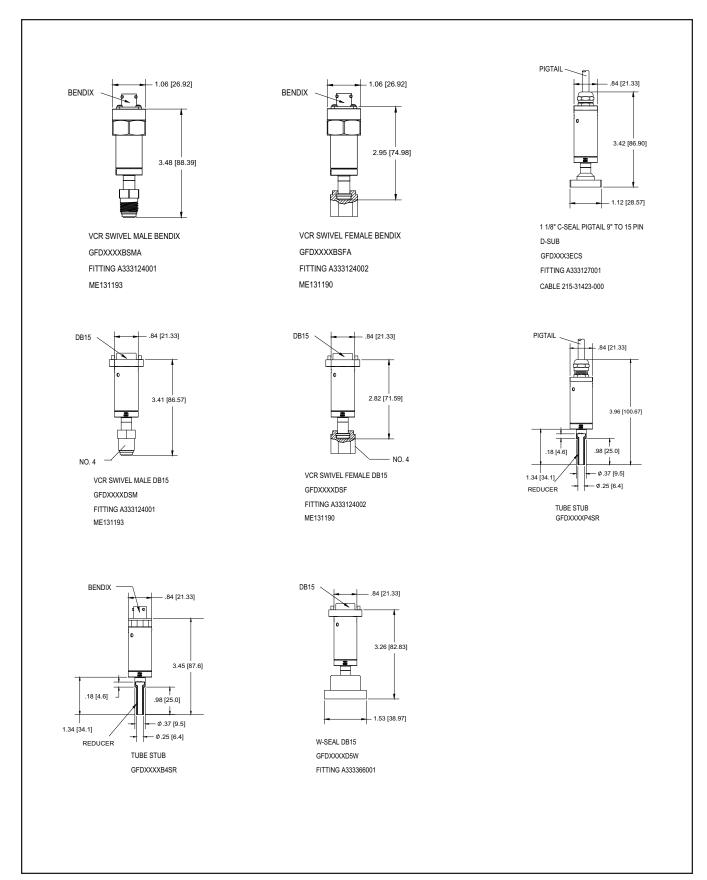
D SolidSense II Pressure Transducer Dimensions for Dead-End with DB15, Bendix and Pigtail Connections
